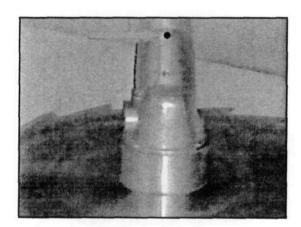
Self tapping screw drilled through the gear head to stop it coming off
